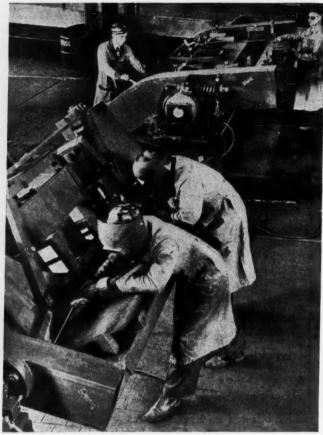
Sub-assemblies are Welded To gether in a Trunnion Fixture which can be Revolved so that All Welding can be done in the "Down" Position
